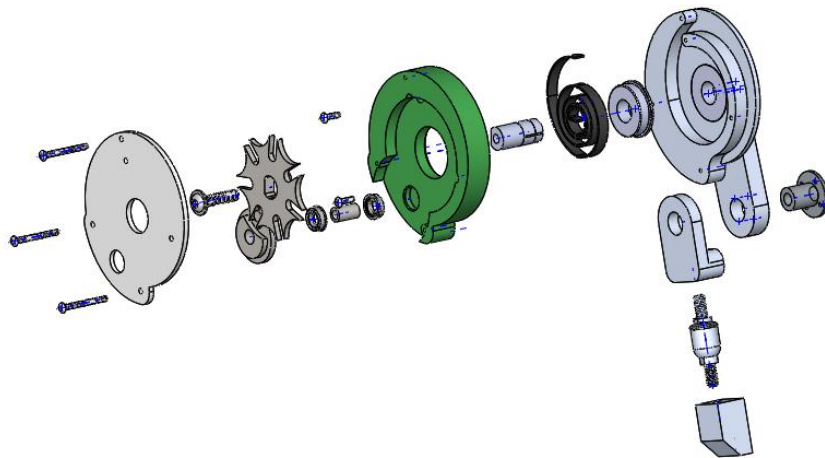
An exploded view of PlayGait's hip pulley mechanism. The spiral torsion spring (black) shares an axis of rotation with the geneva mechanism (gray disk and pin).
